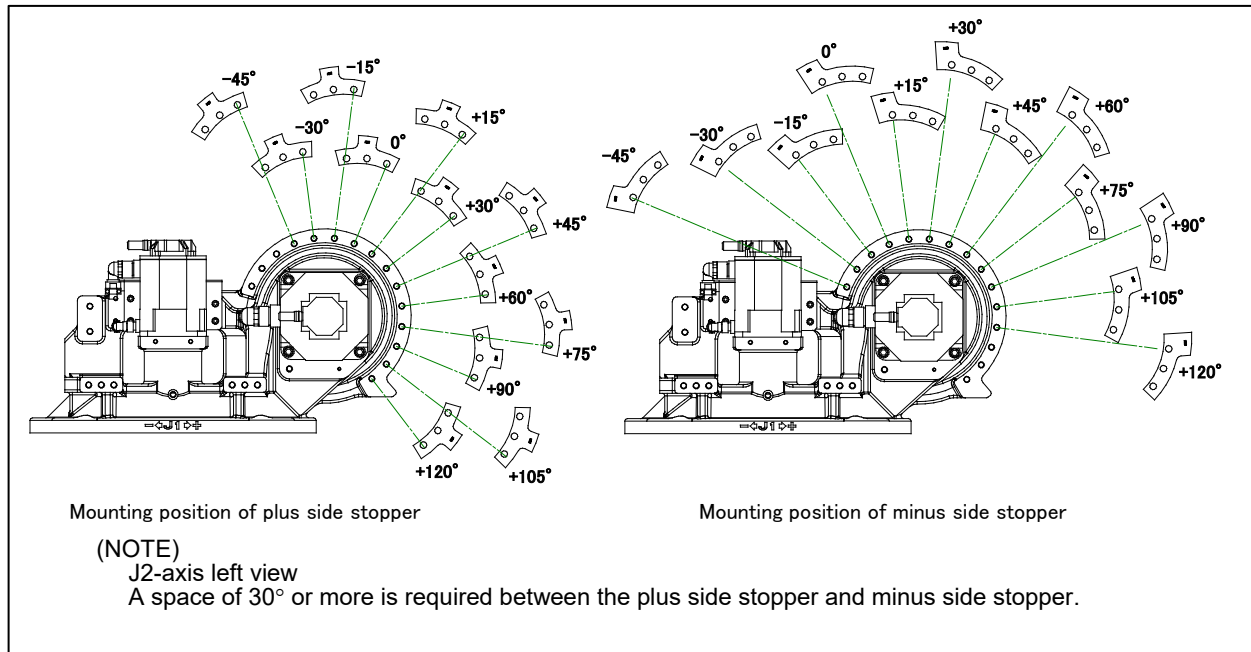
(h) Mounting the J2-axis mechanical stopper (R-2000iB/170CF)
